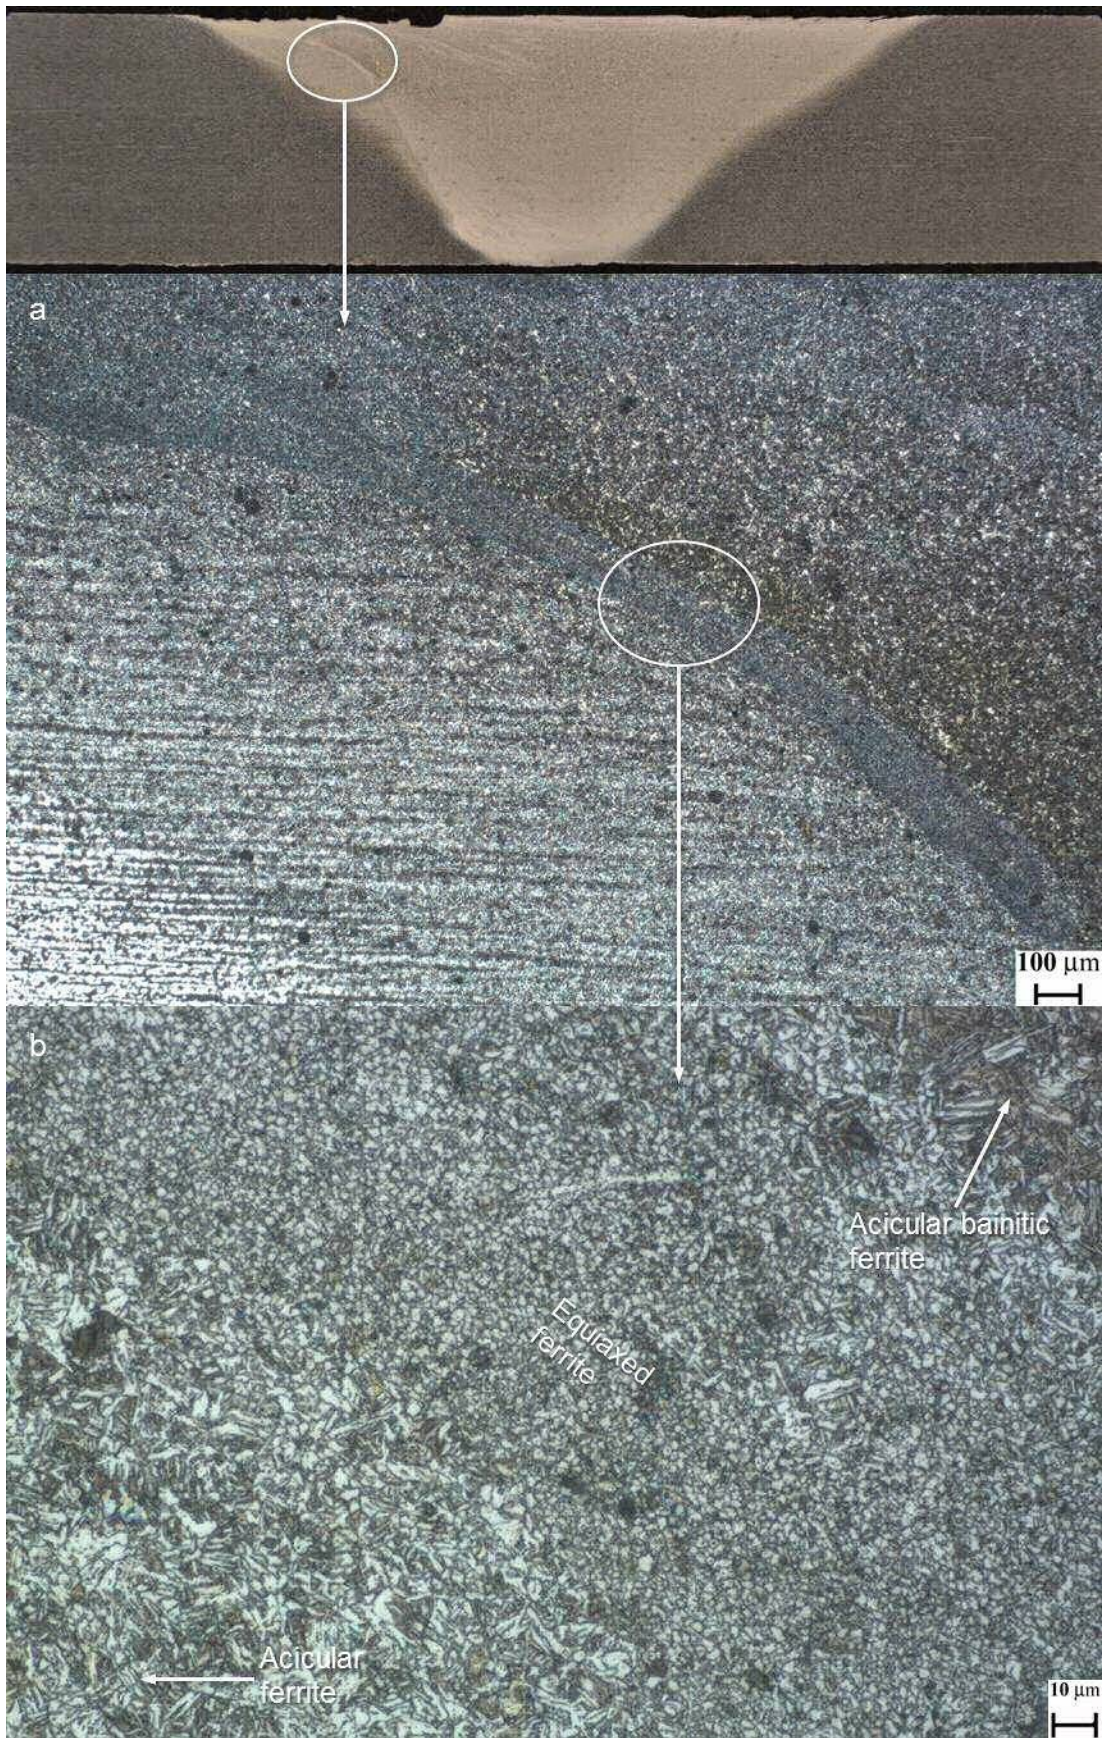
Intermediate weld, top AD side (a) [x50, Etched]; (b) [x500, Etched]
